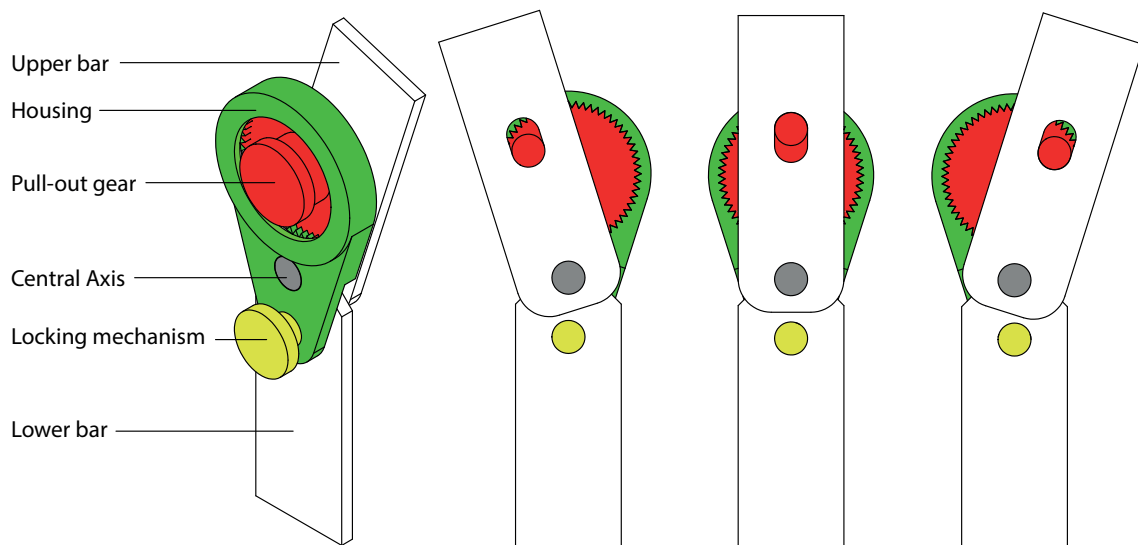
A schematic view of the concept design. When the red gear is pulled out of the housing, the alignment can be adjusted. The yellow pin can be pulled to unlock the mechanism.
